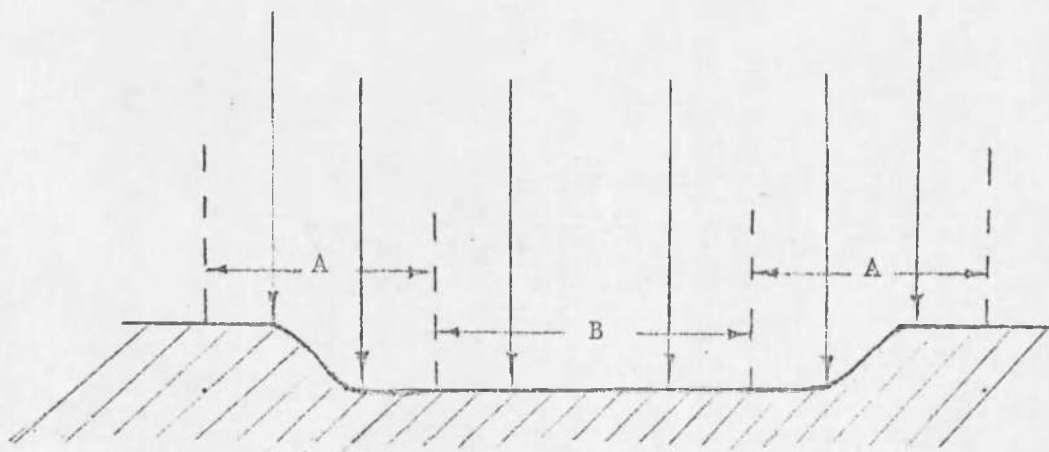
Schematic Drawing of Welded Spot Struck by the X-ray Beams
